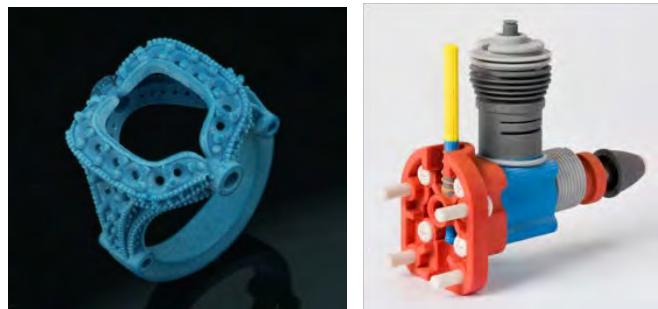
Examples of Parts Fabricated Using 3D Printing (www.objet.com)
